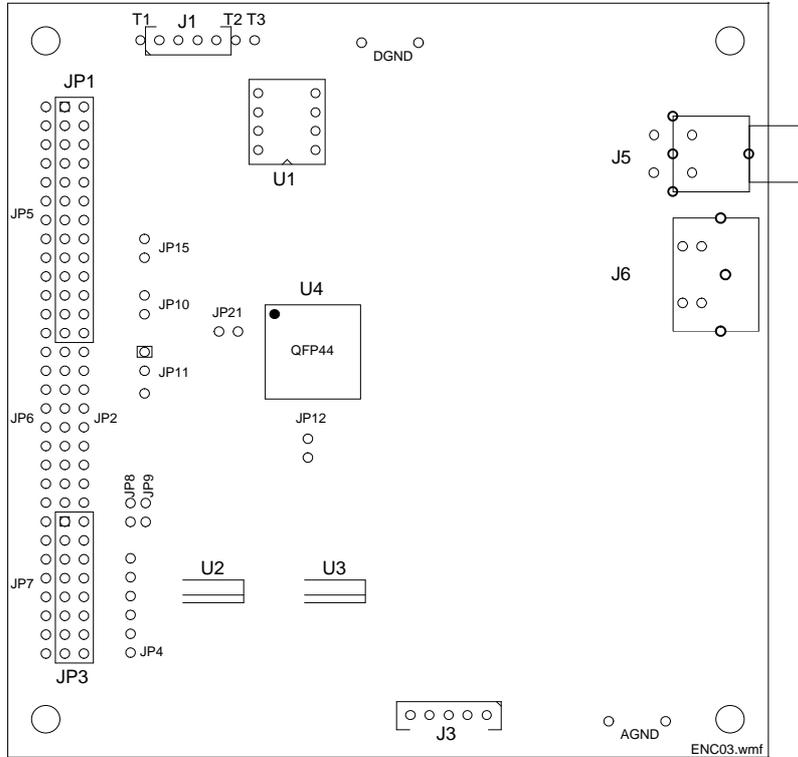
Location of ICs, jumpers and connectors on the ENCMOD03 PCB
